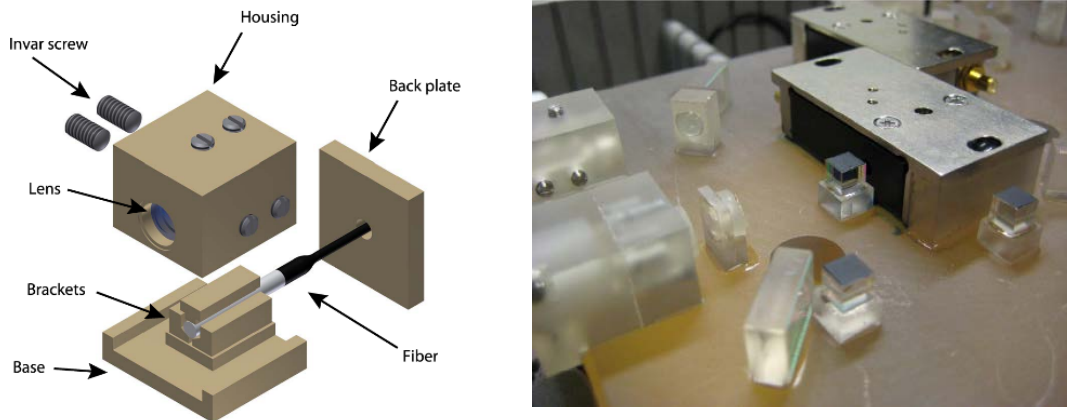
Fiber coupler assembly. Left: 3D CAD drawing. Right: Assembled zerodur couplers which are placed on an optical breadboard. Pictures from [1].
